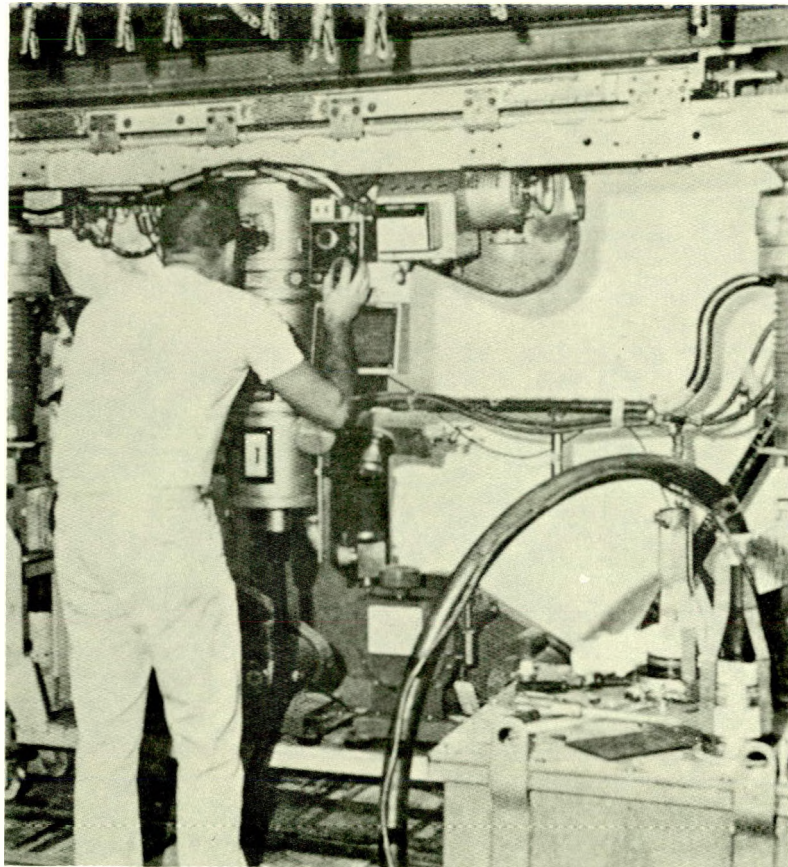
PORTABLE ELECTRON-BEAM WELDER SET UP FOR
